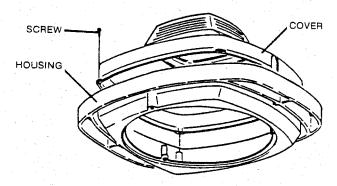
REMOVING LIGHTHEAD COVER
